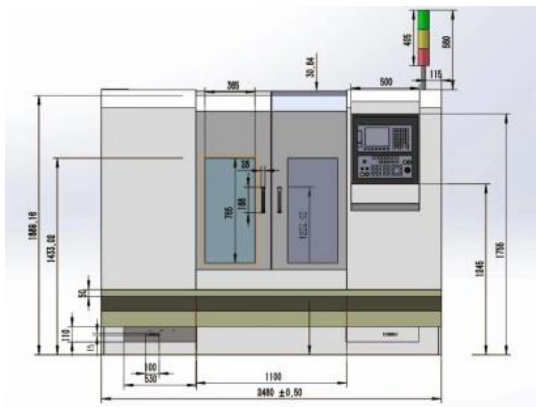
Dimensional drawing of the left and right protective doors in the front of the machine
